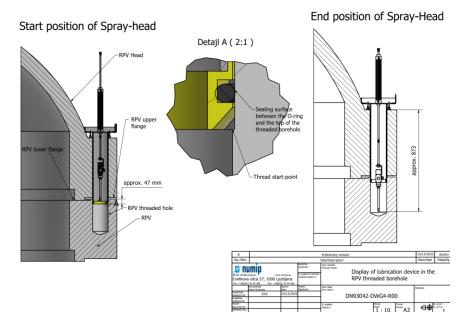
Installation of the device in the RPV threaded borehole with start position of spray head (left), end position of spray head (right) and sealing principle detail (middle).
